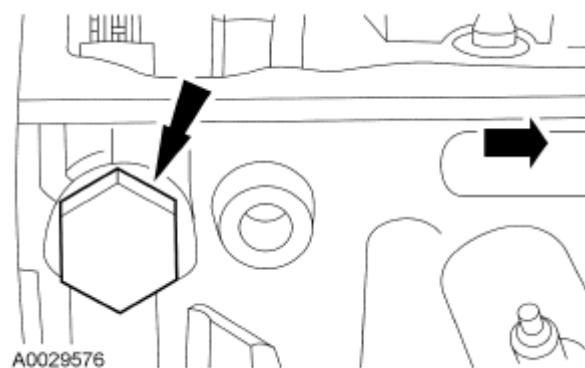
Identifying RH Hydraulic Camshaft Tensioner
